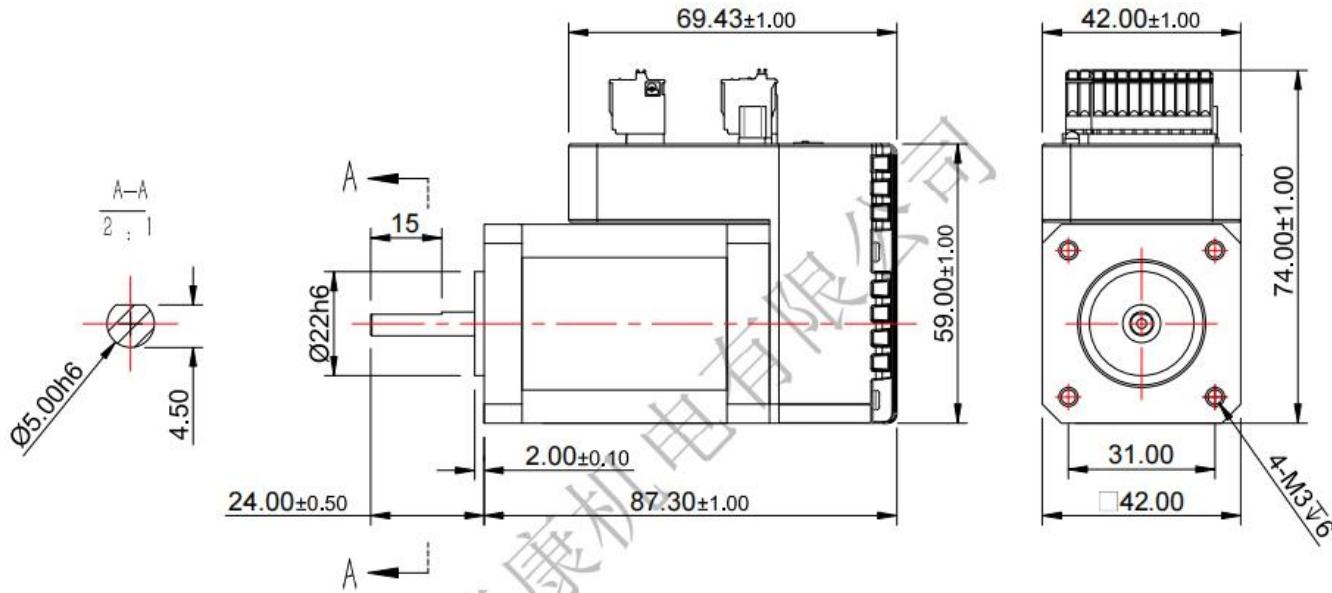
Machine dimension of JMC 1HSS42-R/RC Drive (unit: mm)
